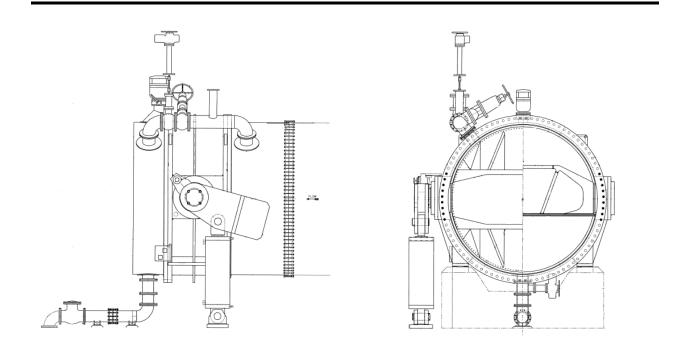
Elevation views of horizontal butterfly valve assembly with flow through disk design and hydraulic operator with hammer-head closure weight
